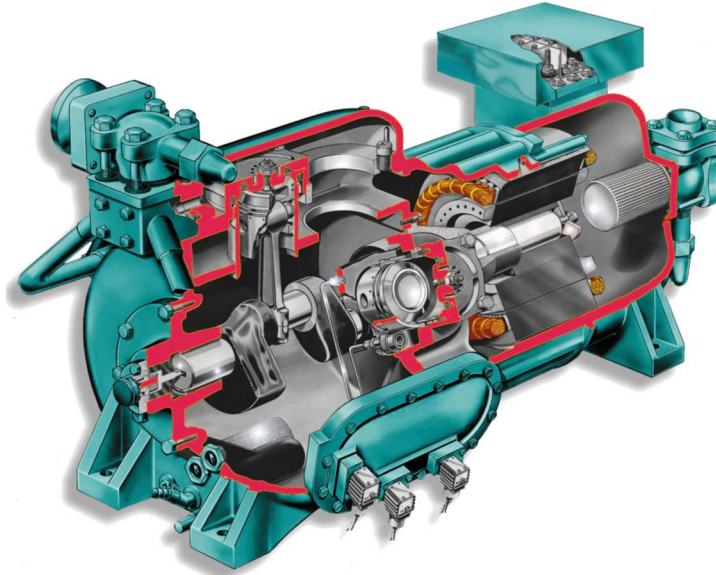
Cut-away of a reciprocating compressor (courtesy of York/Johnson Controls)
